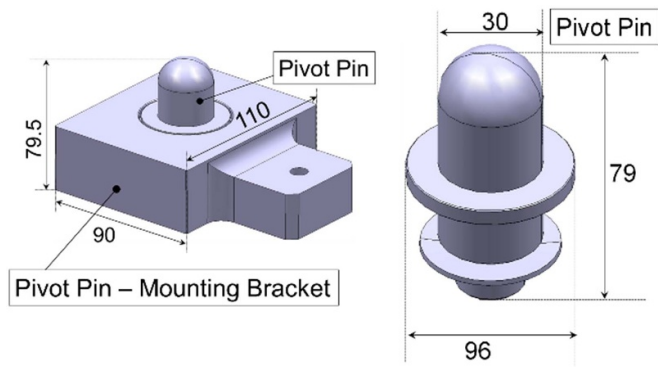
Left: ‘Pivot Pin-mounting bracket’ assembly which is attached to the ‘baseplate’ (see figure 32). Right: ‘Pivot Pin’ assembly. Dimensions in millimetres.
